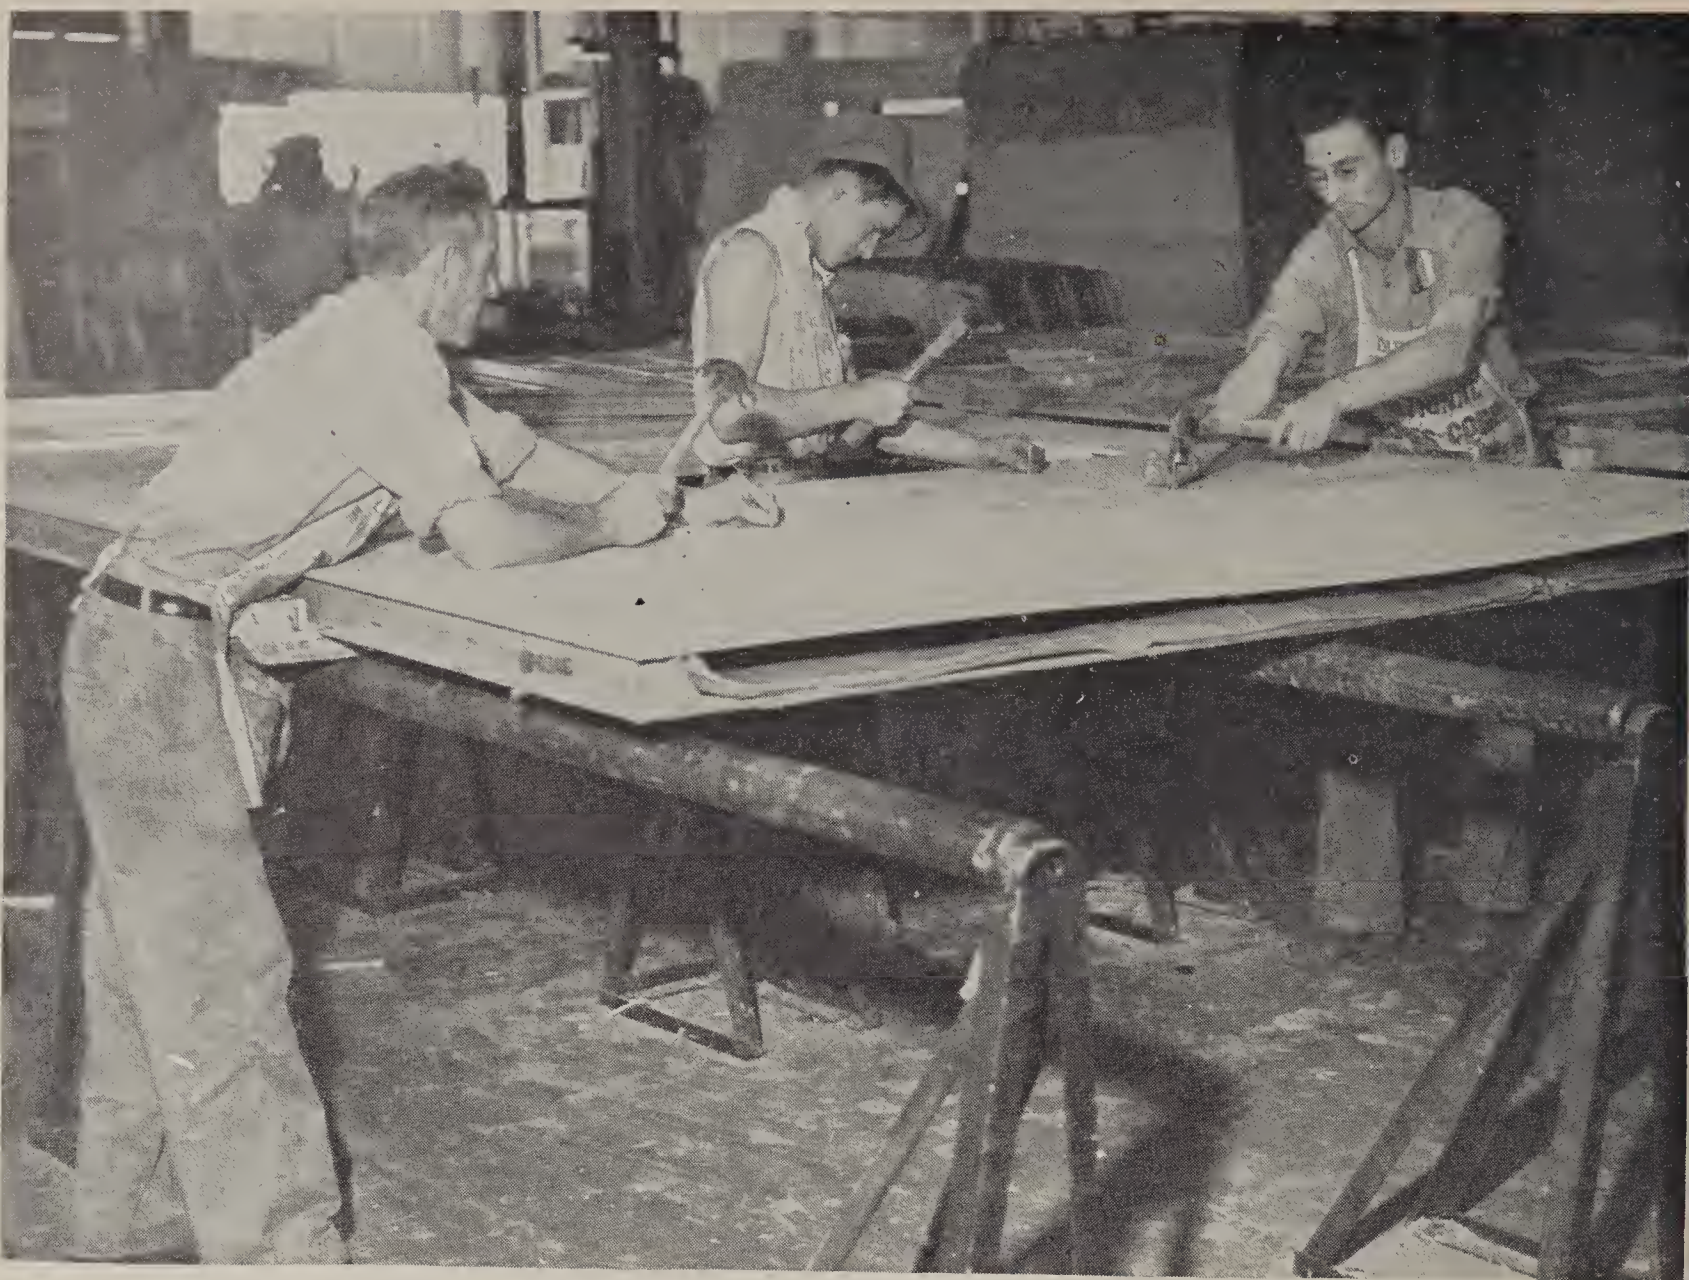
Roller-top metal stands used for assembly of panels in line production.
